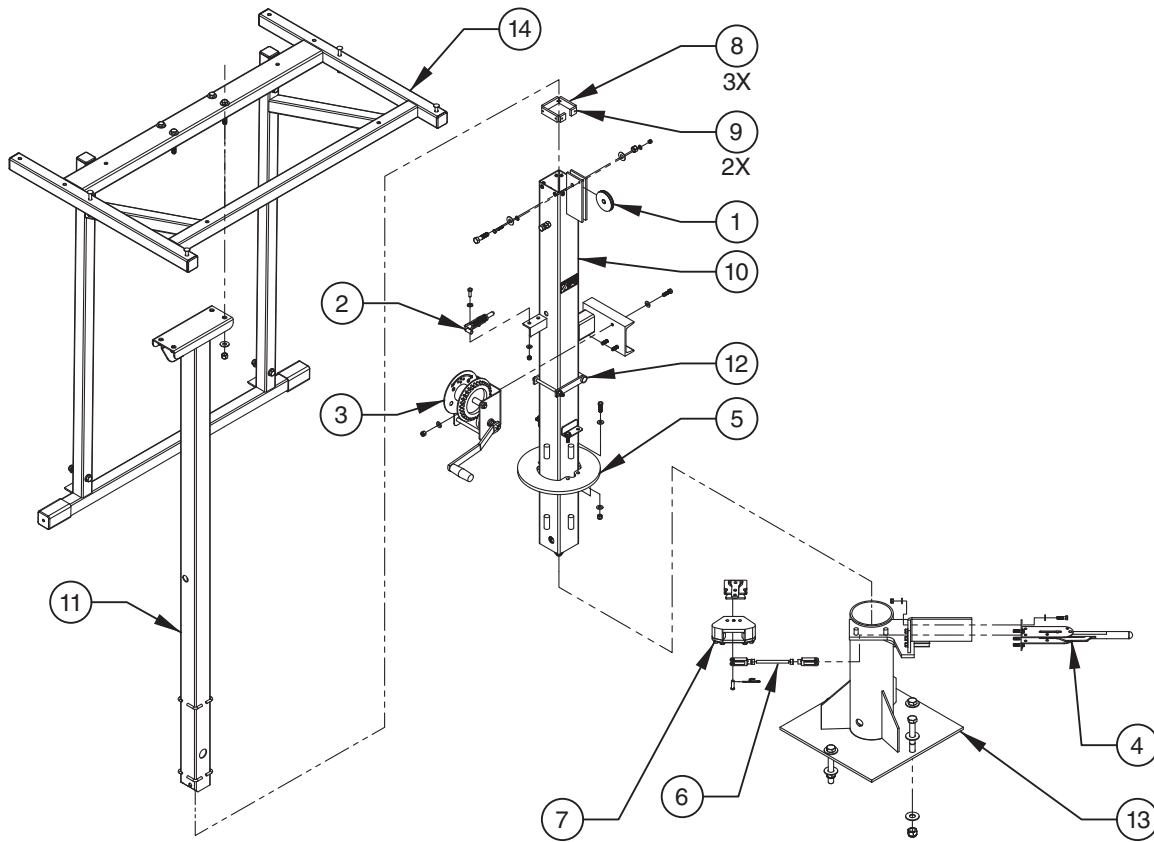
Parts drawing: Mini tower assembly with hydraulic lift
